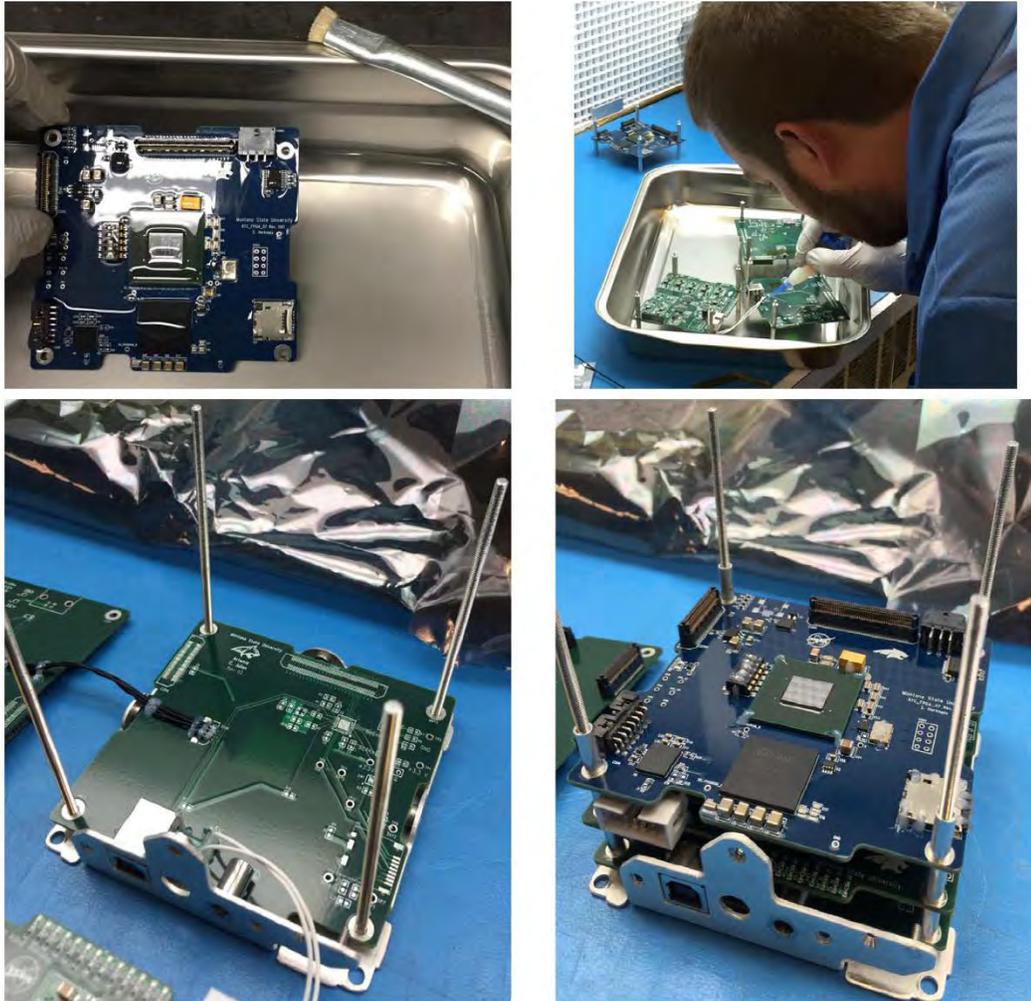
Artemis board cleaning (top-left), staking (top-right), and assembly (bottom).
